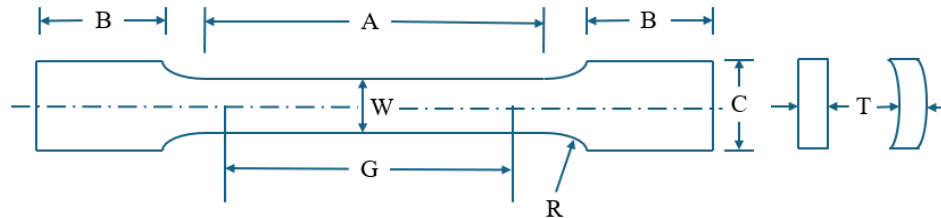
Tension test specimens dimension for large diameter tubular products [10].
